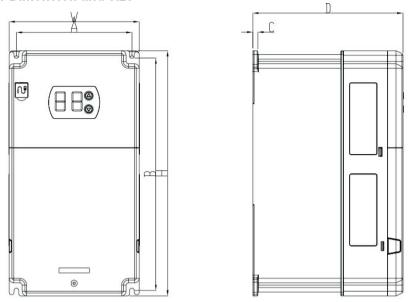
Installation dimension of EC100 elevator intelligent integrated machine
